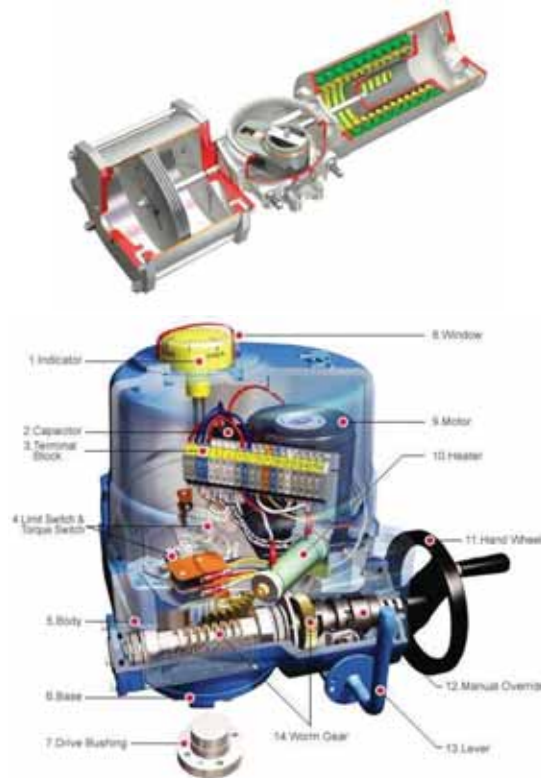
Pneumatic or hydraulic actuator and electrical actuator
